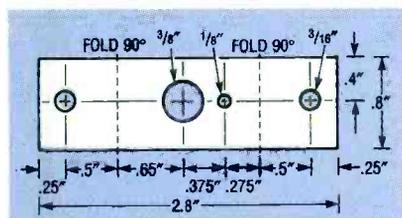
POTENTIOMETER MOUNTING bracket. Make the potentiometer mounting bracket from a 0.8- by 2.8-inch piece of 0.032-inch thick aluminum.
